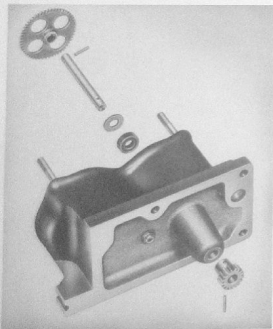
Assembling Pinion Gear Drive Shaft and Drive Gear—Composite View
